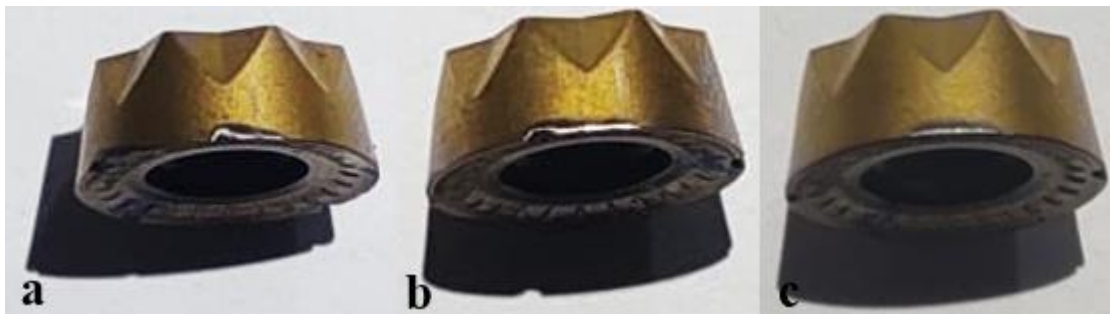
Different wear forms of the inserts in the tool holder when the tool is run-out
